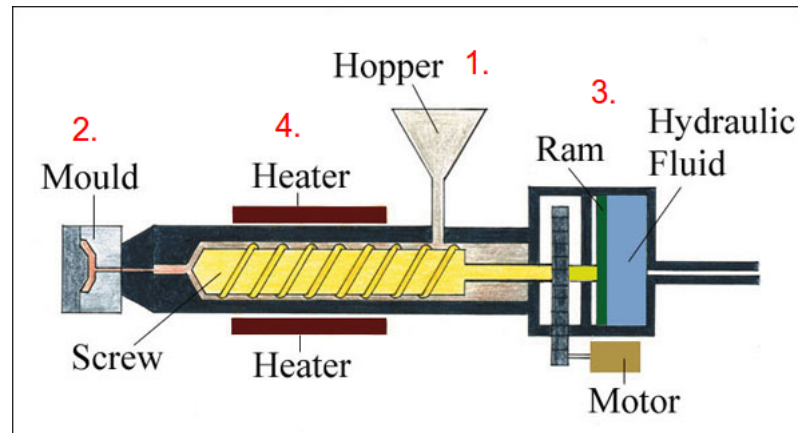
Manufacturing honeycombs through injection moulding method (<http://www.technologystudent.com/watt/wattex.htm>)
